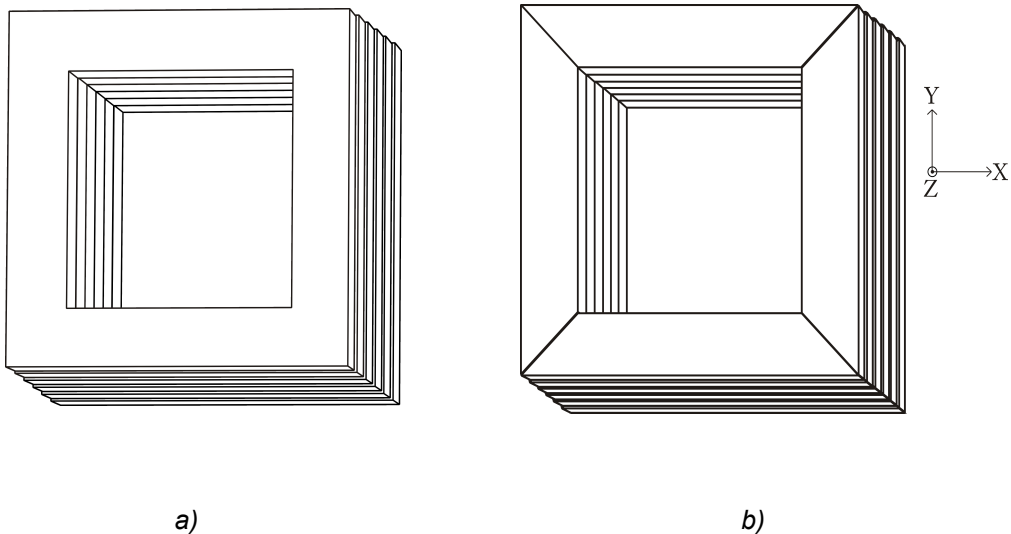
Transformer test core a) assembly with laminations out of one piece (the transformer test setup design) b) a lap joint assembly and the coordinate system
